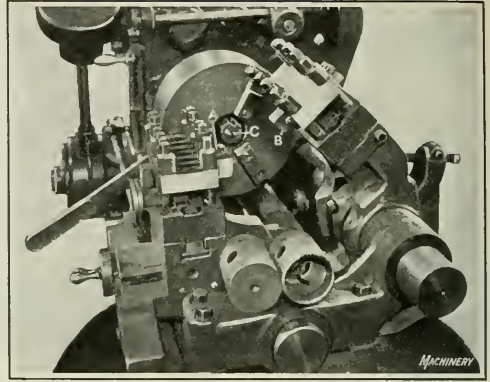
Fay Automatic Lathe tooled up for finish-boring and facing the Open End, and centering the Closed End of the Piston
